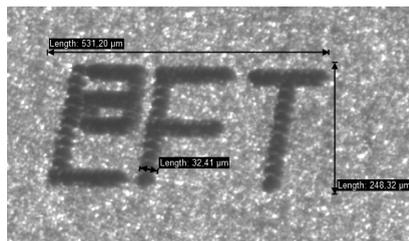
Result of a laser marking operation with a Micro Machining Unit
